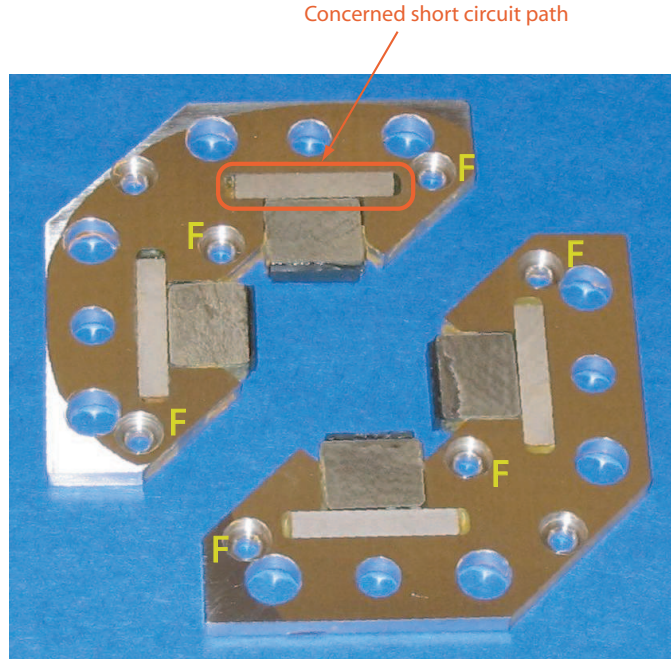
Middle assembly. The six holes labelled by letter “F” are used to fix the middle assembly on the grinding machine bed.
